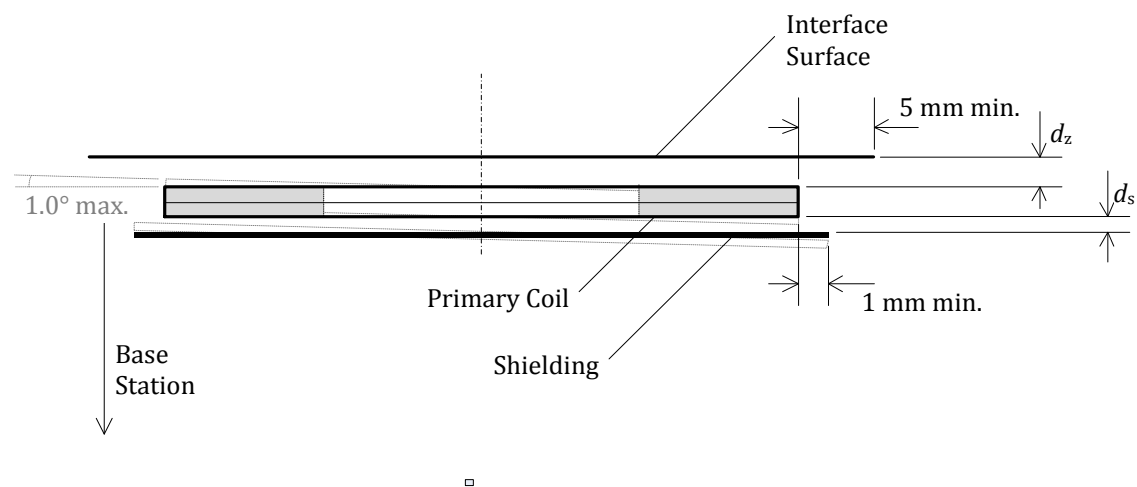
Primary Coil assembly of Power Transmitter design A18
